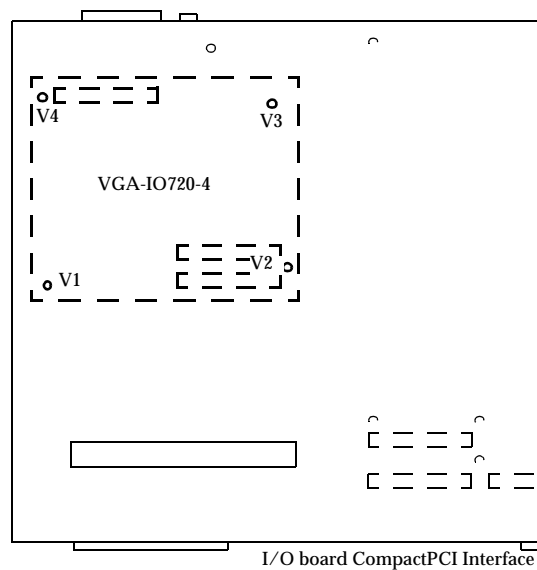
Mounting Points of the VGA-IO721-4 on the Bottom of an I/O Board
